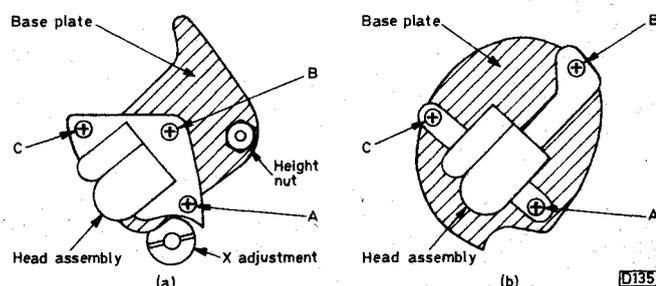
Typical audio/control head assembly layouts, (a) with height adjustment nut, e.g. Hitachi models, (b) without height adjustment nut, e.g. Ferguson 3V22.
